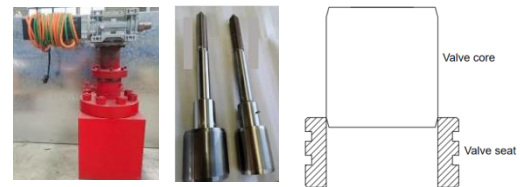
Physical Diagram of the Improved Electro-Control Choke Valve and Schematic of Valve Core-Valve Seat Matching
